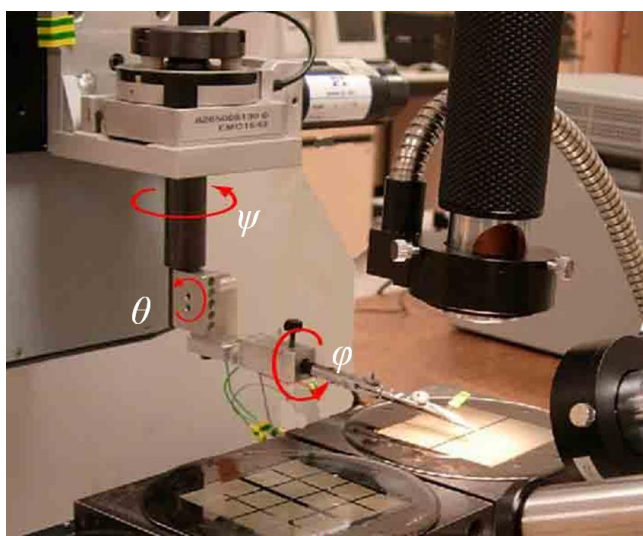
Closed-up view of the working space and the gripper fixtures.
